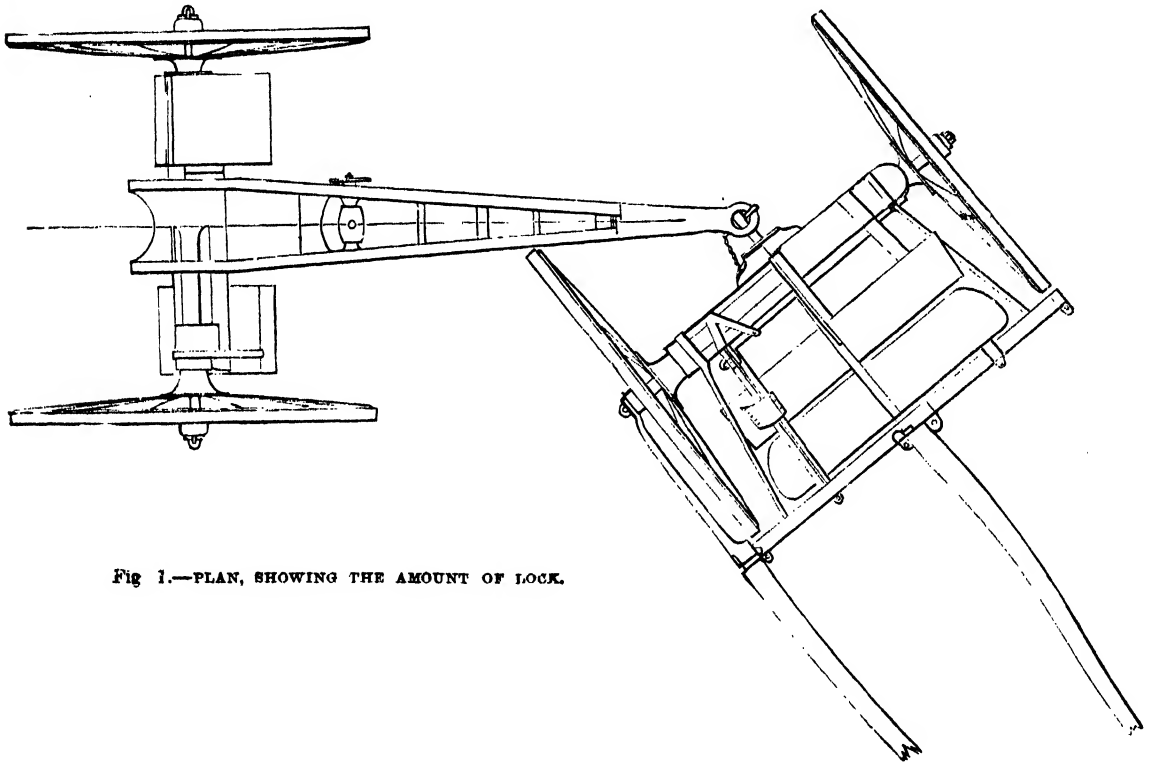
PLAN, SHOWING THE AMOUNT OF LOCK.
